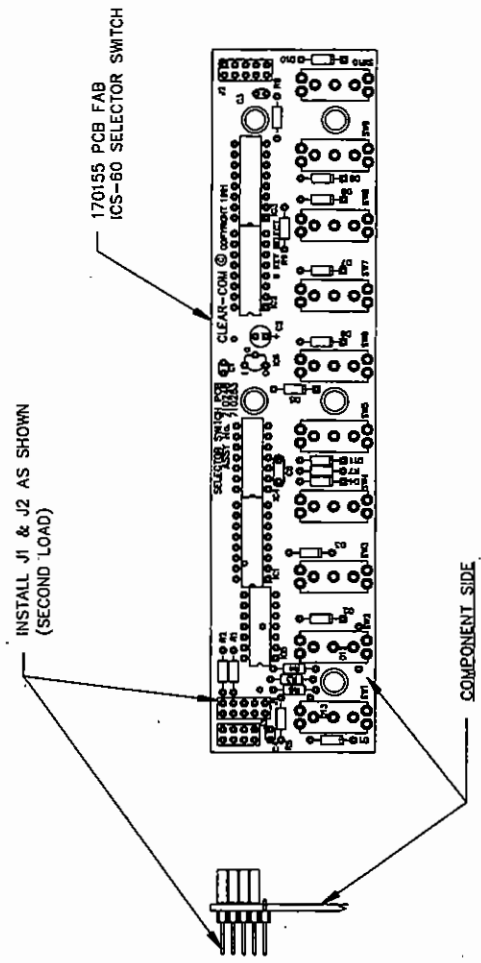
Assembly Drawing - ICS-102 Selector Switch PCB Rev. A
